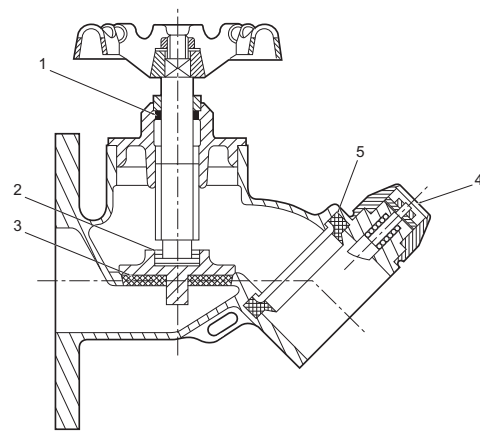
Spares detail - Bibnose valve 1420 Series with flanged inlet and 2.5 inch female instantaneous BS336 outlet
